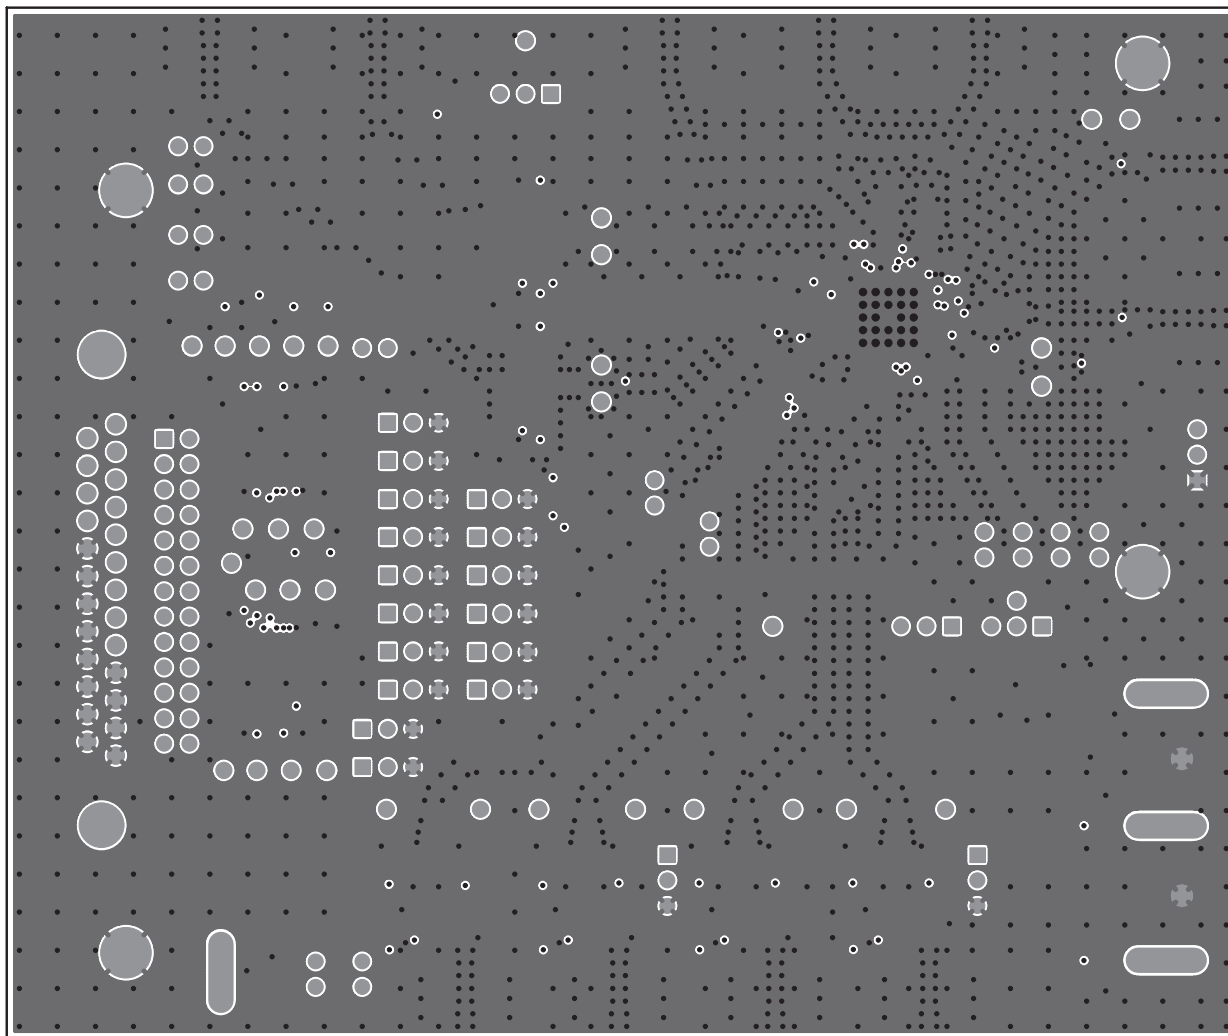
MAX2839AS EV Kit PCB Layout—Inner Layer 2, Ground Layer
